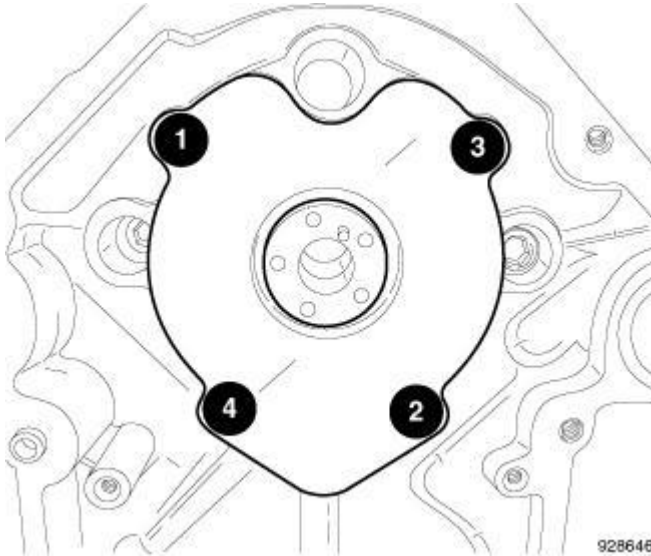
Camshaft Thrust Plate Bolt Tightening Sequence
